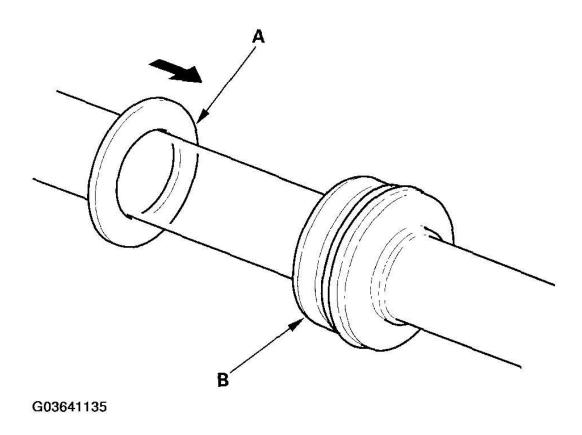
Installing New Backup Ring Courtesy of AMERICAN HONDA MOTOR CO., INC.
